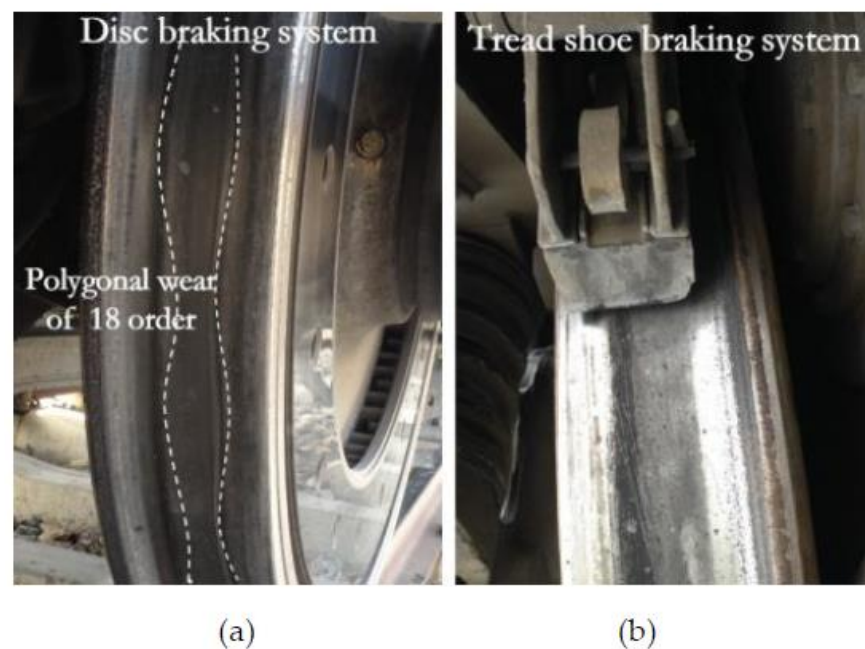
(a) Electric locomotive wheel with disc braking system; (b) locomotive wheel with brake shoe system.
